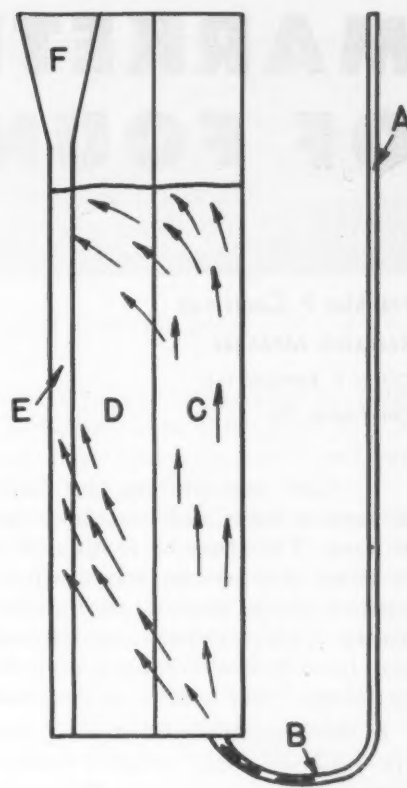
Actual flow conditions in a conventional side-gated casting. Much of metal continues to flow through lower parts of casting cavity, following channels established in the early part of the pour.
